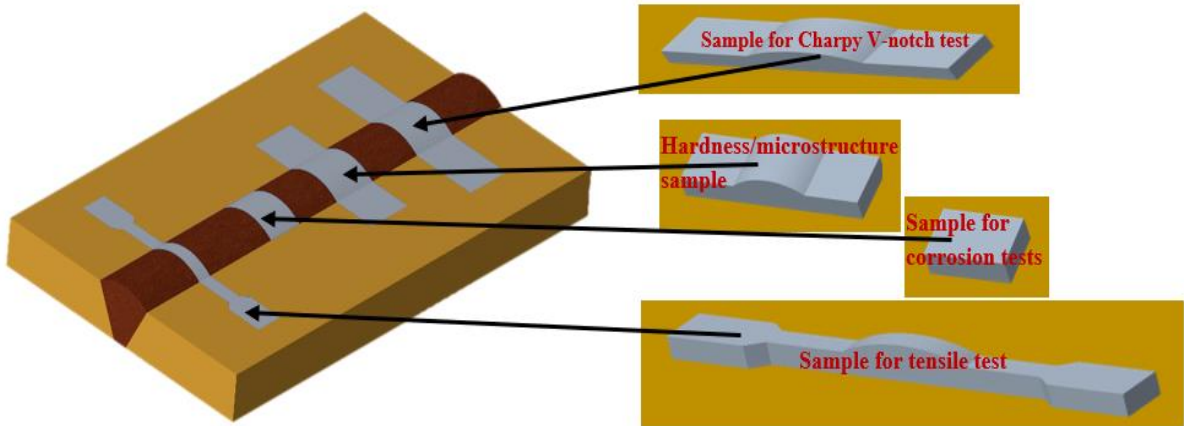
Schematic Diagram for Test Samples for Mechanical and Corrosion Testing
